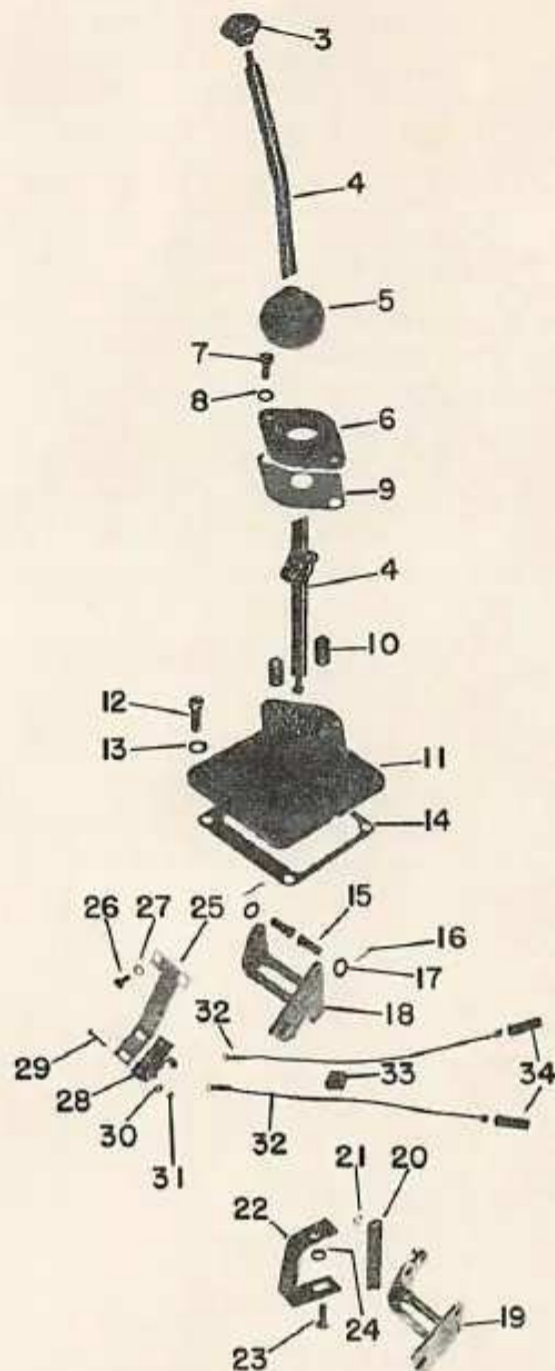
Exploded view of transmission shift and interlock cover. Interlock (18) is used on Row Crop and Wheatland models; interlock (19) is used on Industrial and Utility models and is optional on Row Crop and Wheatland models. Refer to Fig. O119 for safety starting switch adjustment.
